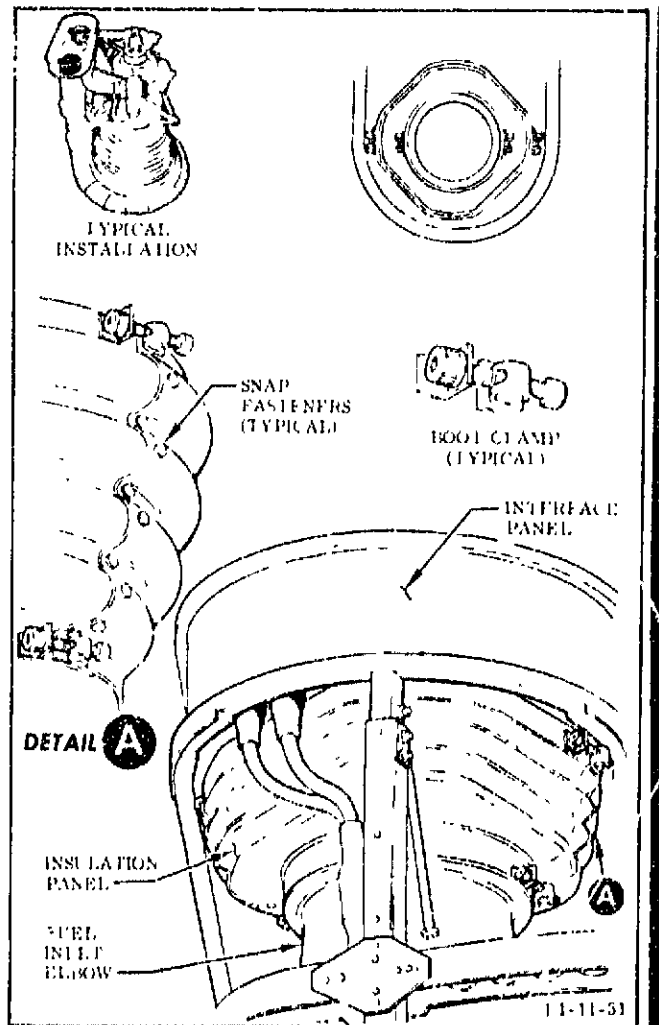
A. Fuel Inlet Elbow Insulation Boot Installation
